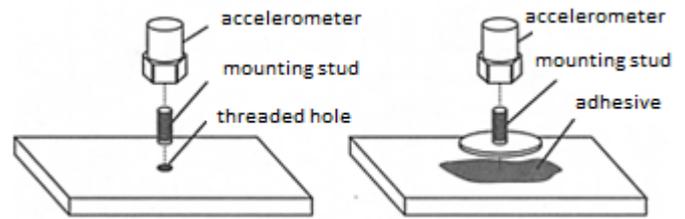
Examples of stud mounting method [3,4]: accelerometer can be mounted by a stud screwed into a threaded hole or adhered to the tool by glue or wax
